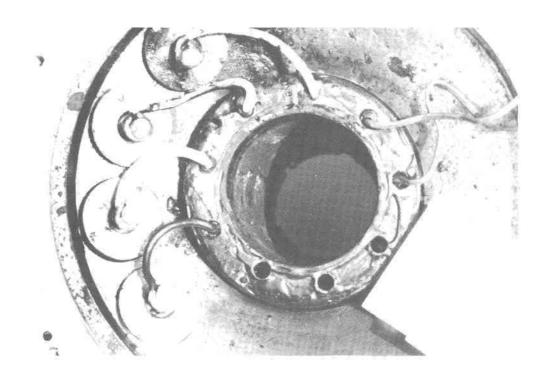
Permanent Magnet Alternator Failure Caused by Arcing between Adjacent Stator Coils
